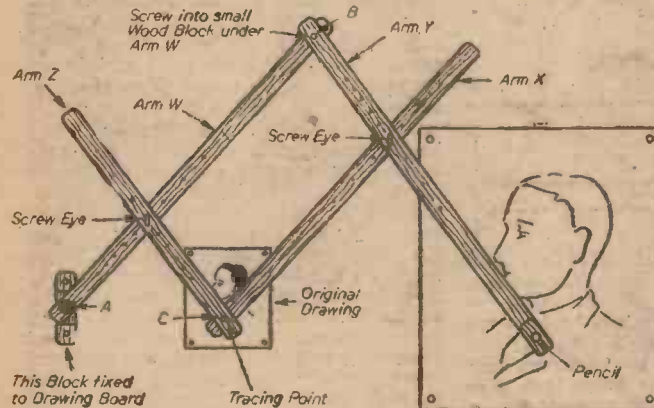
The pantagraph completed. The assembling of the parts is clearly shown in this illustration.
